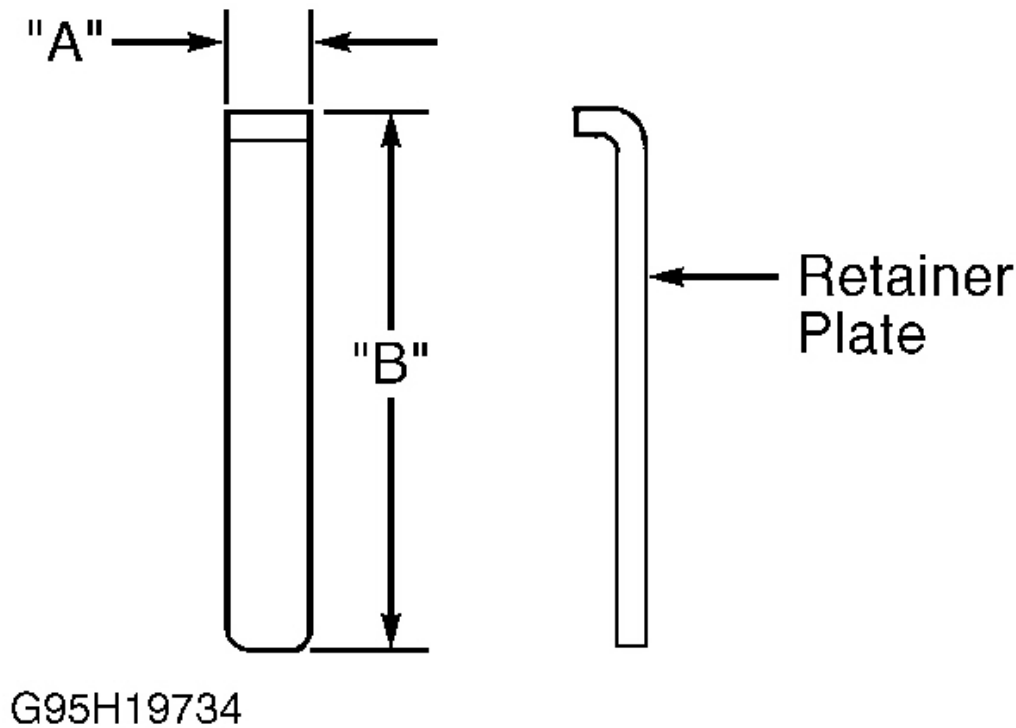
Measuring Retainer Plate Dimensions (Upper Valve Body)
